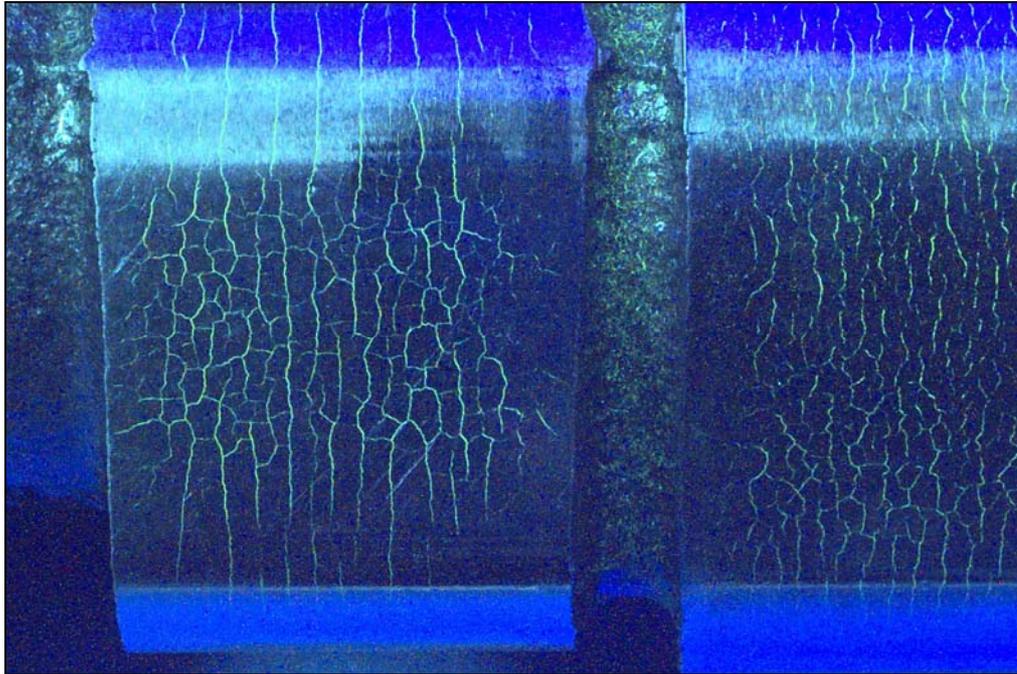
Close view of surface micro-cracking on two of the cam surfaces, highlighted by magnetic particle inspection.
